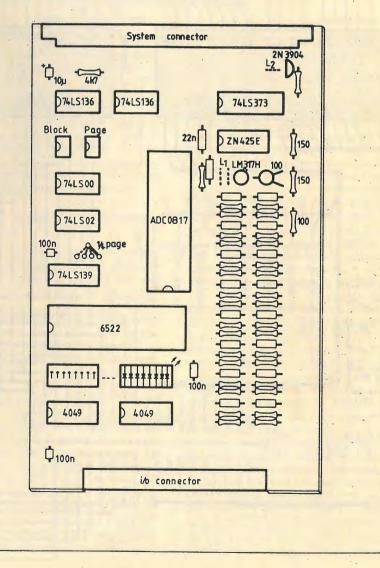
Board layouts and component location diagram. Assembled boards and kits will be available from Control Universal, 11 Bush House, Bush Fair, Harlow, Essex, CM186NS.
